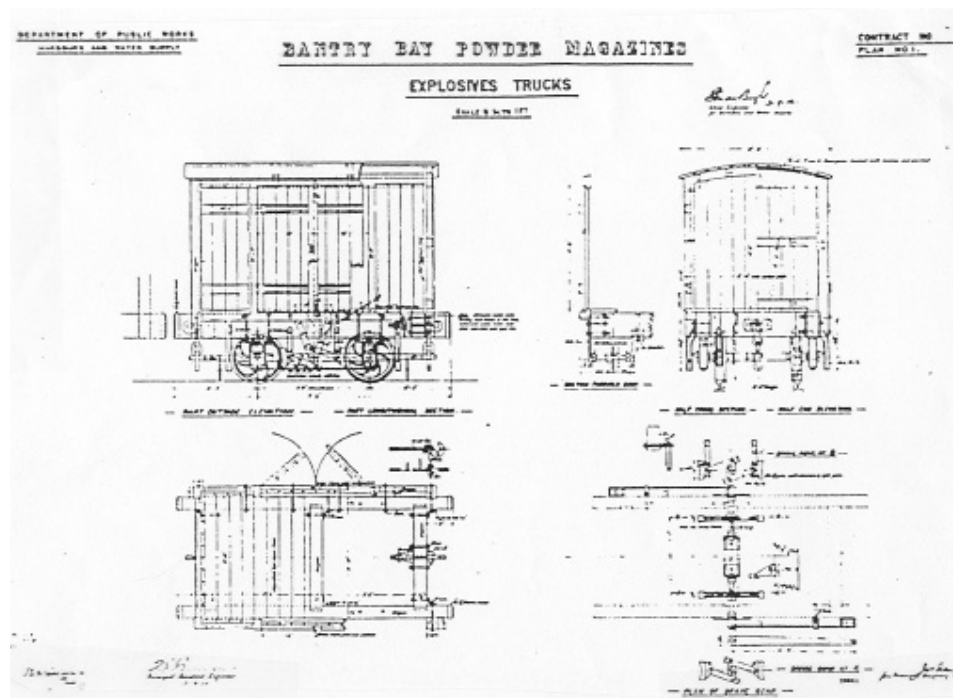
Timber light rail trolley, Department of Public Works, n.d.
